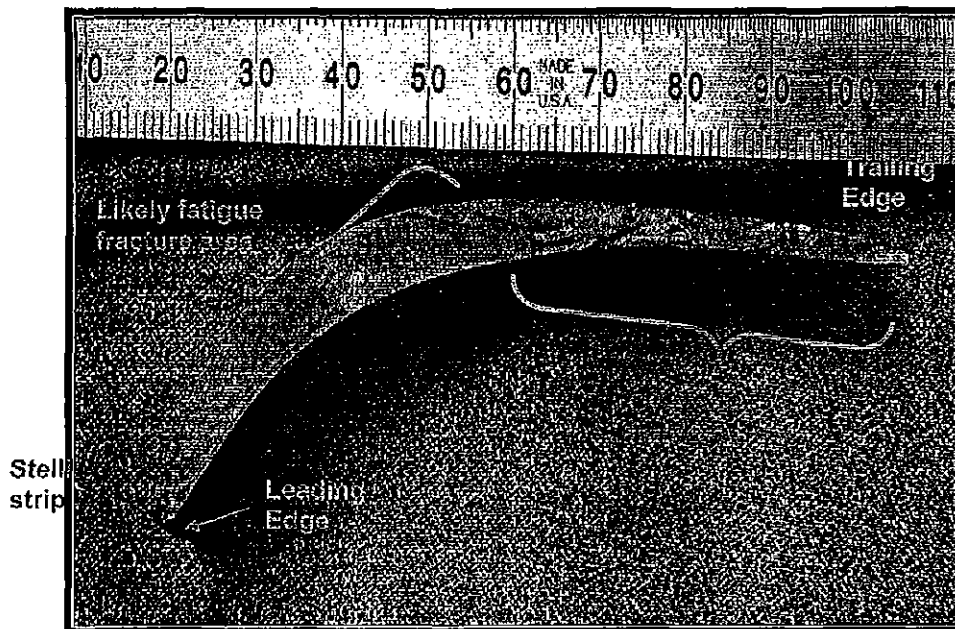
Macro photograph of fracture surface of LP-A L-2 #175 blade. Fracture surface was cleaned to remove thick oxide deposit. Flat fracture surface can be seen from the leading edge continuing into a fracture surface due to overload towards the trailing edge.
